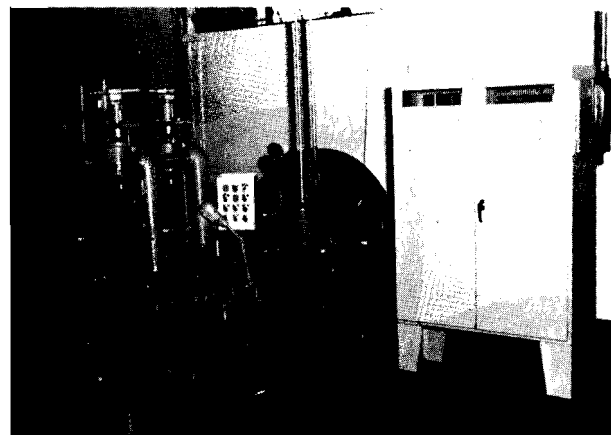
2-HIGH FORM-ROLLING MILL
